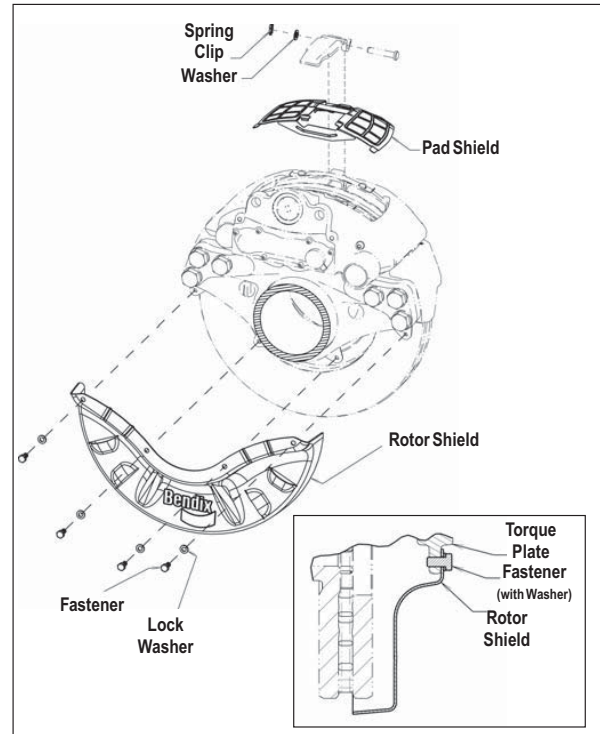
TRAILER AXLE EXPLODED VIEW WITH INSET SHOWING ROTOR SHIELD INSTALLATION
